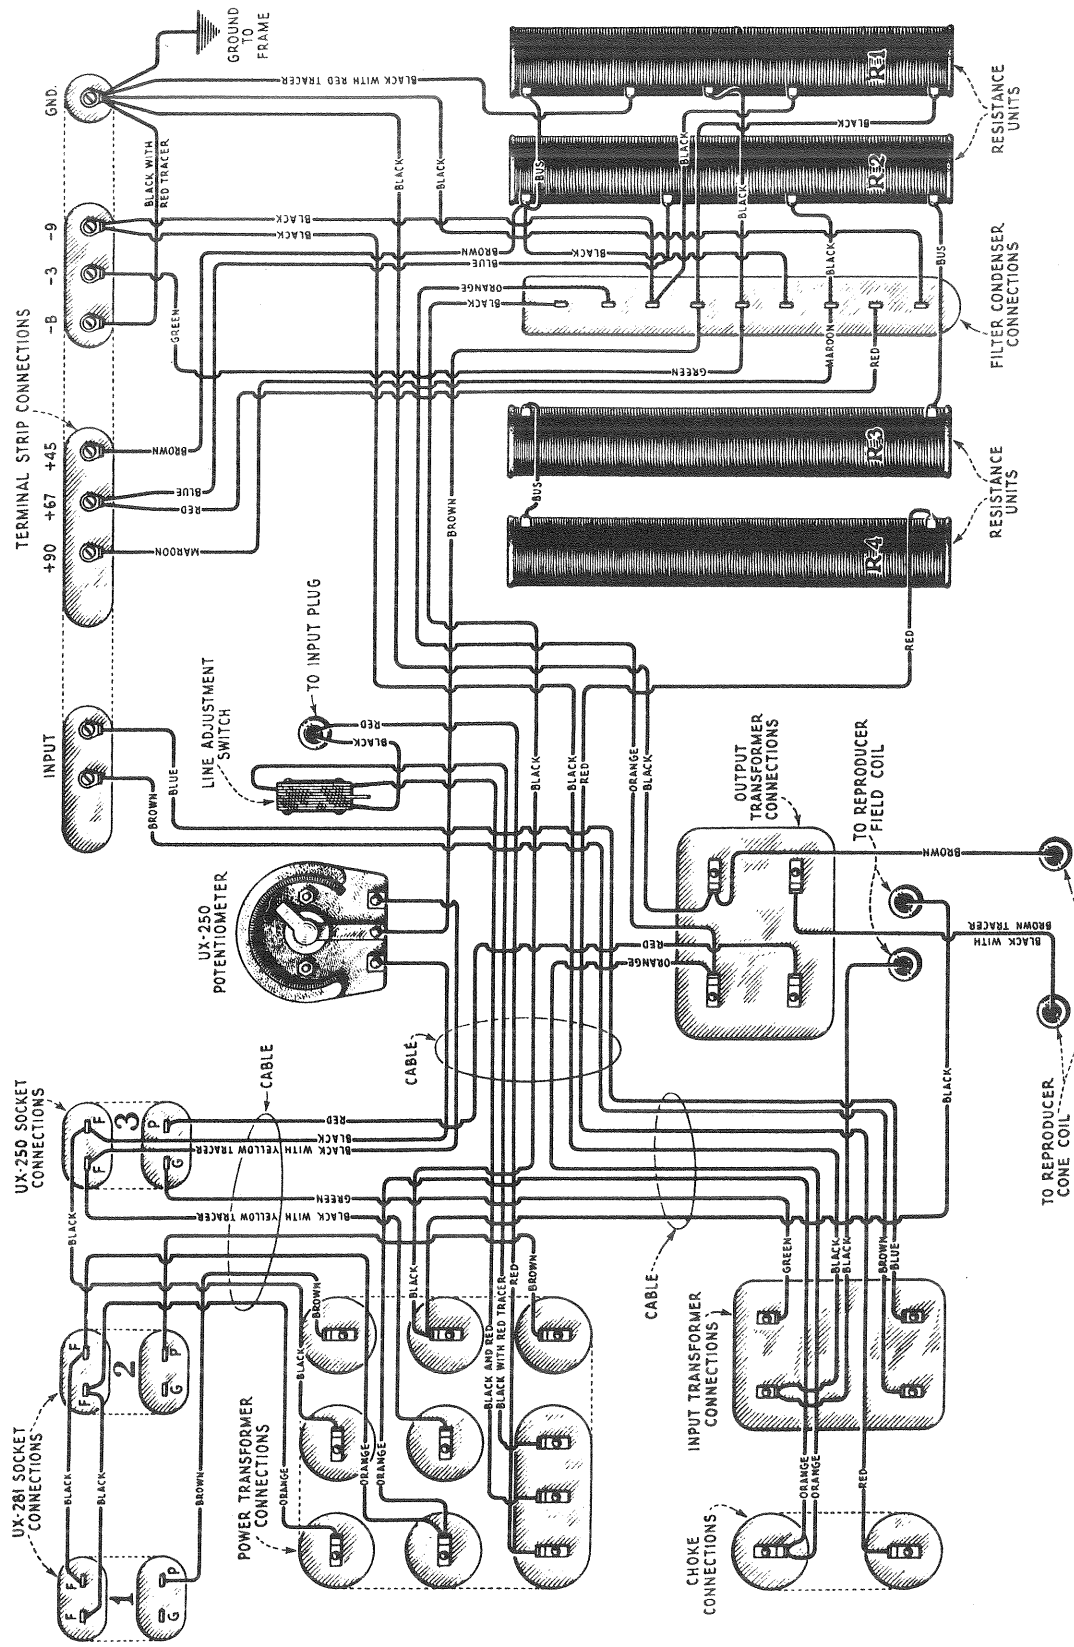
Sub-chassis assembly and continuity wiring diagram.
